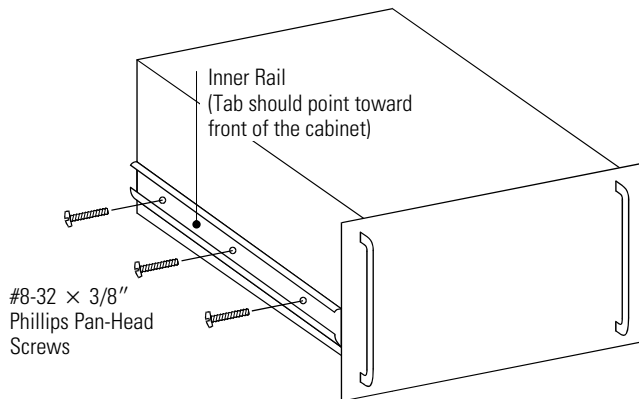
Attaching the Inner Rail to the UPS Cabinet
